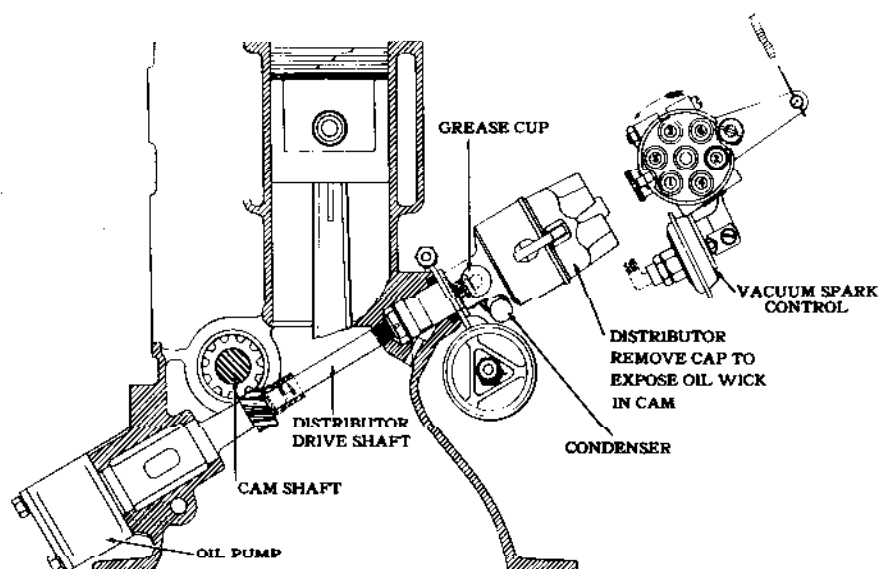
Illustration No. 1—Showing Assembly of Distributor and Oil Pump Drive Shaft—J-15 Models
